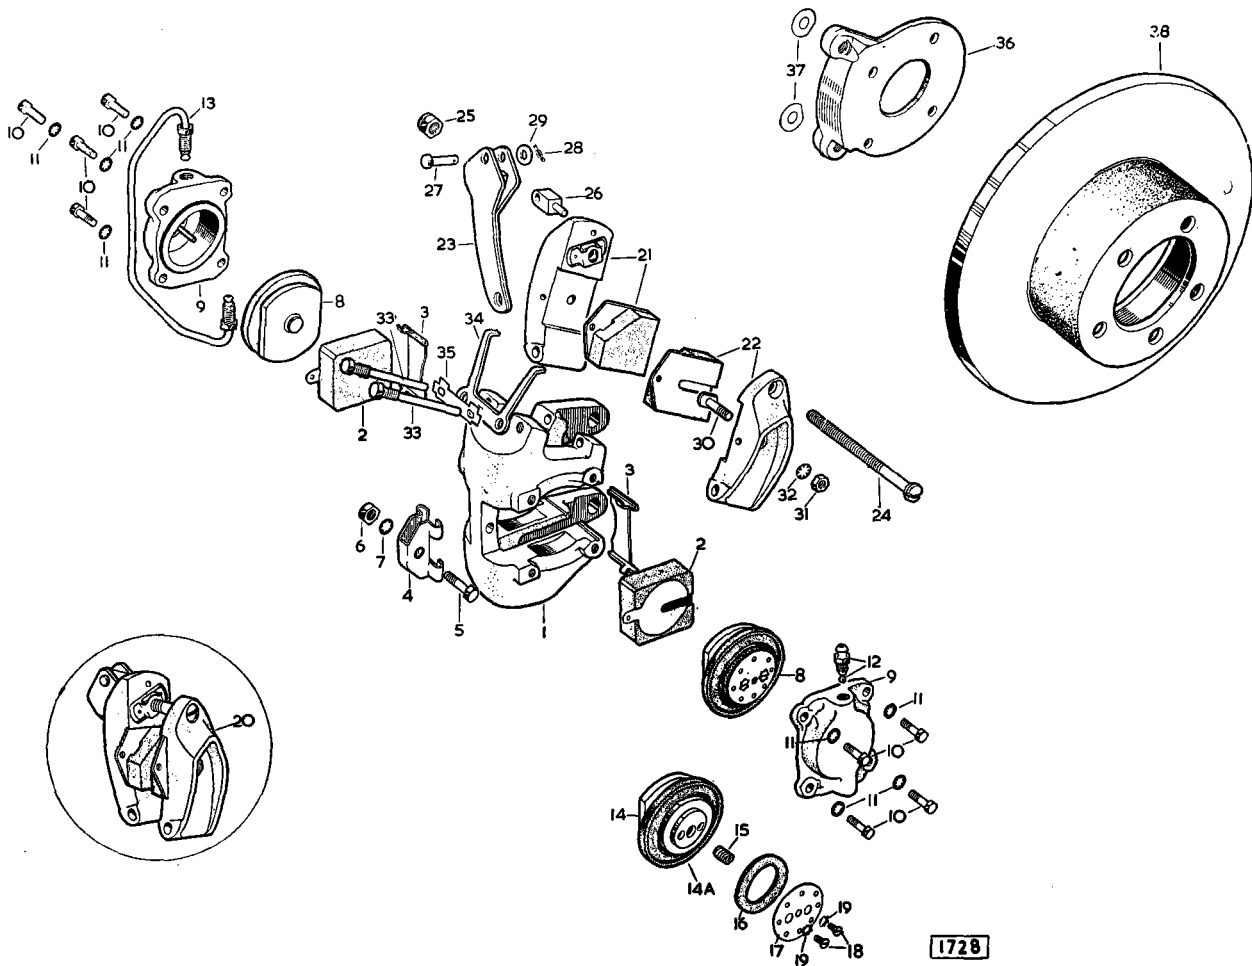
Exploded view of rear brake caliper (Early Cars).
